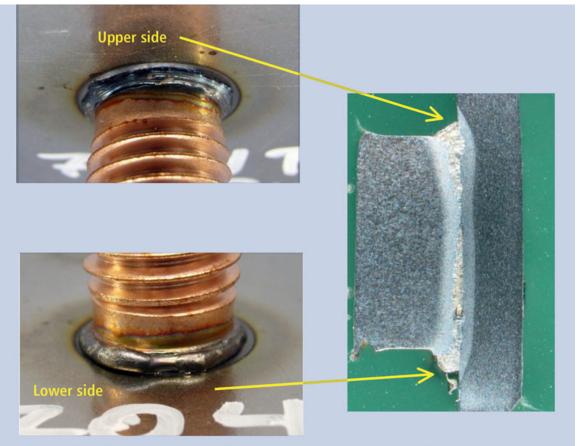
• SRM stud welding out-of-position, PC (at vertical wall), under shielding gas M21 - ArC - 18 with magnetic field additional fixture, stud: M12, S235, sheet: S355, welding conditions: current intensity: 900 A, welding time: 170 ms, lift 2.0 mm, immersion depth: 0.5 mm, shielding gas: M21 -ArC - 18
